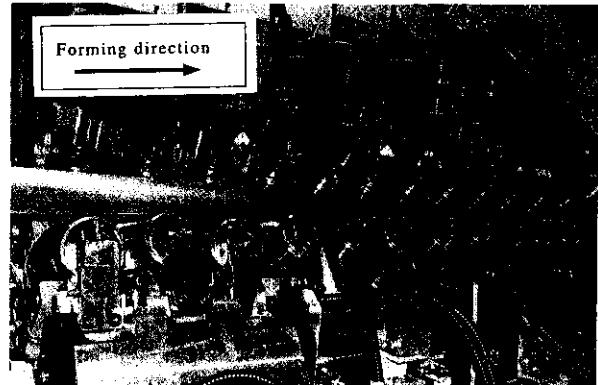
Appearance of strip sheet in cage roll forming zone of CBR forming mill
